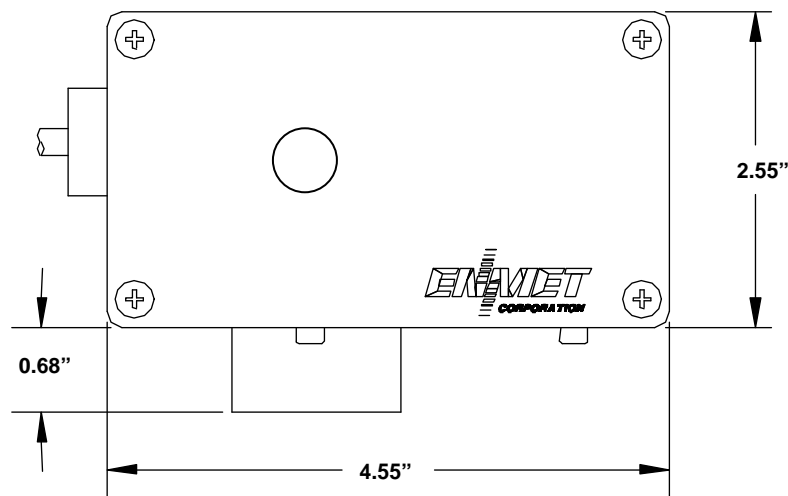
Sensor/Transmitter 10015-1105, External Front View
